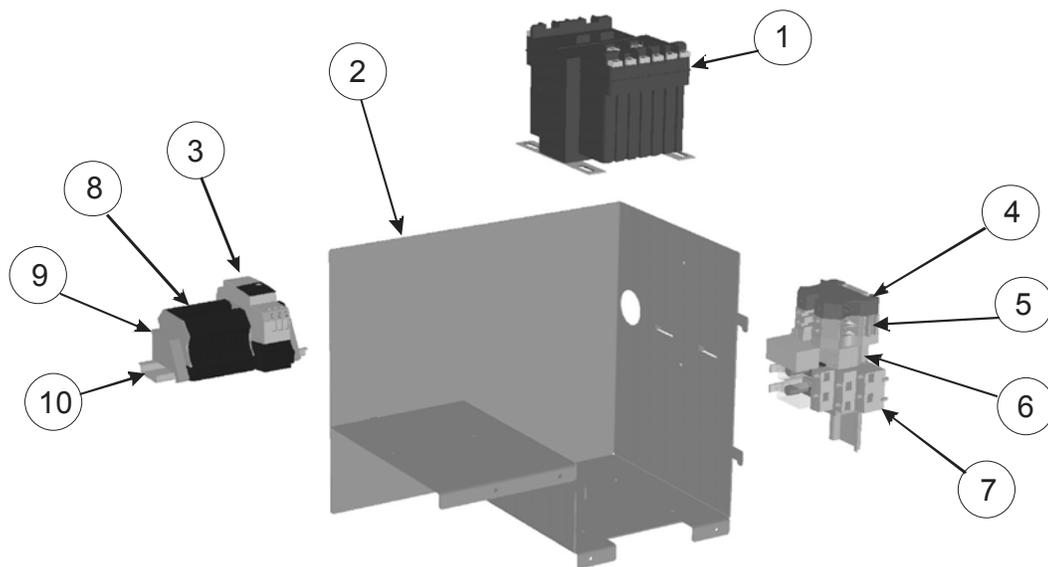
MHTC Reflow Hydraulic Unit Electrical Parts
